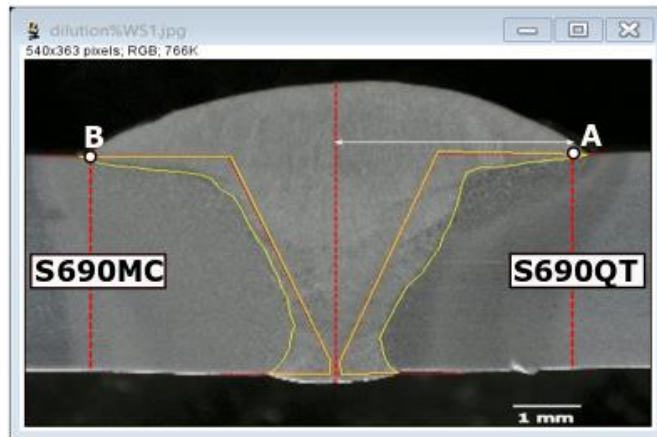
Cross-section of the welded joint showing the dilution zone coverage by weld metal and its influence in the unsymmetrical thermal cycle measurement in the HAZ.
